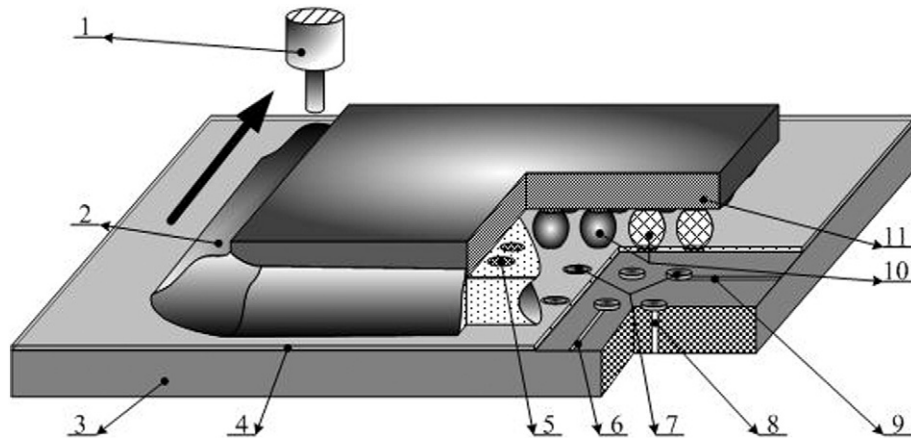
The conventional underfill encapsulation process for one line dispensation: 1 dispenser; 2 encapsulant; 3 substrate; 4 solder mask; 5 under bump metallization (UBM); 6, 9 printed circuits; 7 solder pads; 8 through hole; 10 solder bumps; and 11 die.
